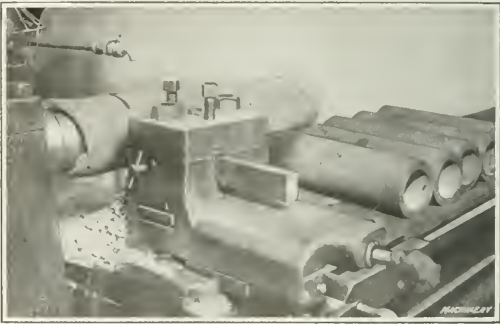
Cutting off Open End of High-explosive Shell Forging
